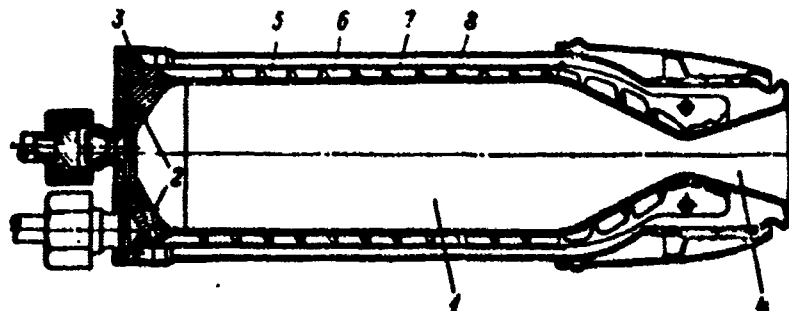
Liquid-fuel thrust chamber. 1) combustion chamber; 2) injectors; 3) chamber head; 4) nozzle end of chamber; 5) inner shell; 6) cooling passage (cooling jacket); 7) outer shell; 8) component feed to cooling passage.
